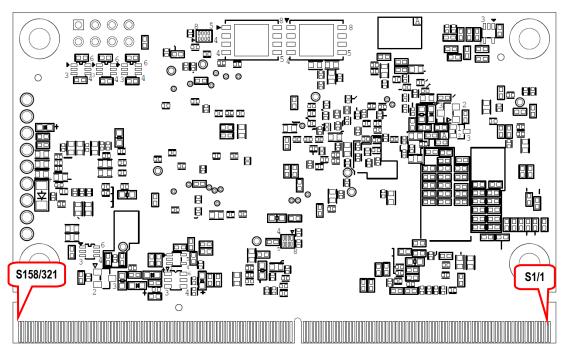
EACOM Board Pin Numbering, Bottom Side
